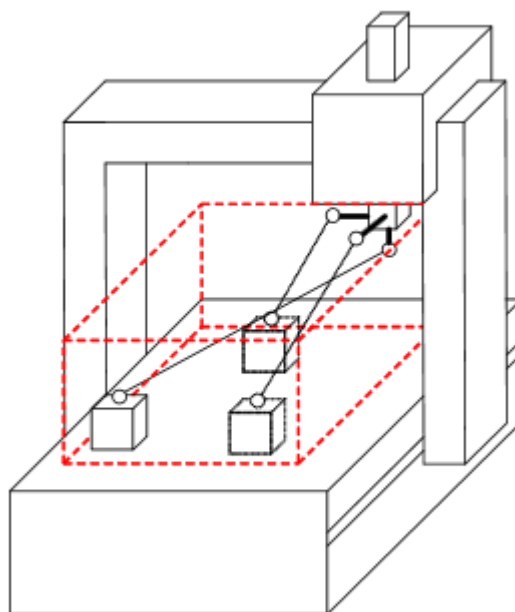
Multi-angulation setup of laser tracers in a machine tool or CMM. [14]
